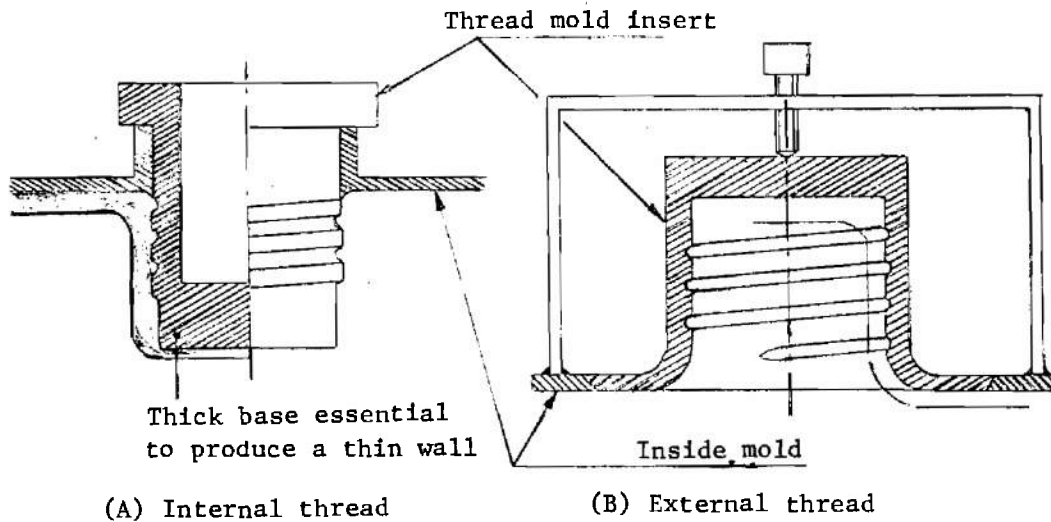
Thread Mold Inserts<sup>2</sup>
